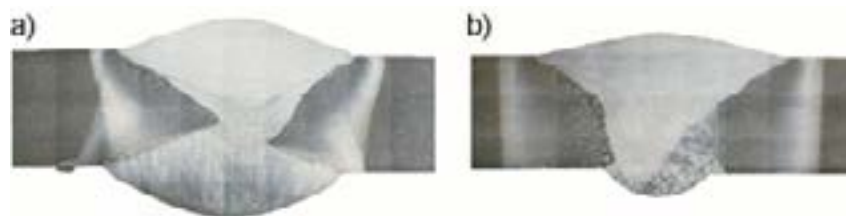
Cross-sectional metallographic specimens of the I (a) and V-shaped weld (b) in steel S960QL
